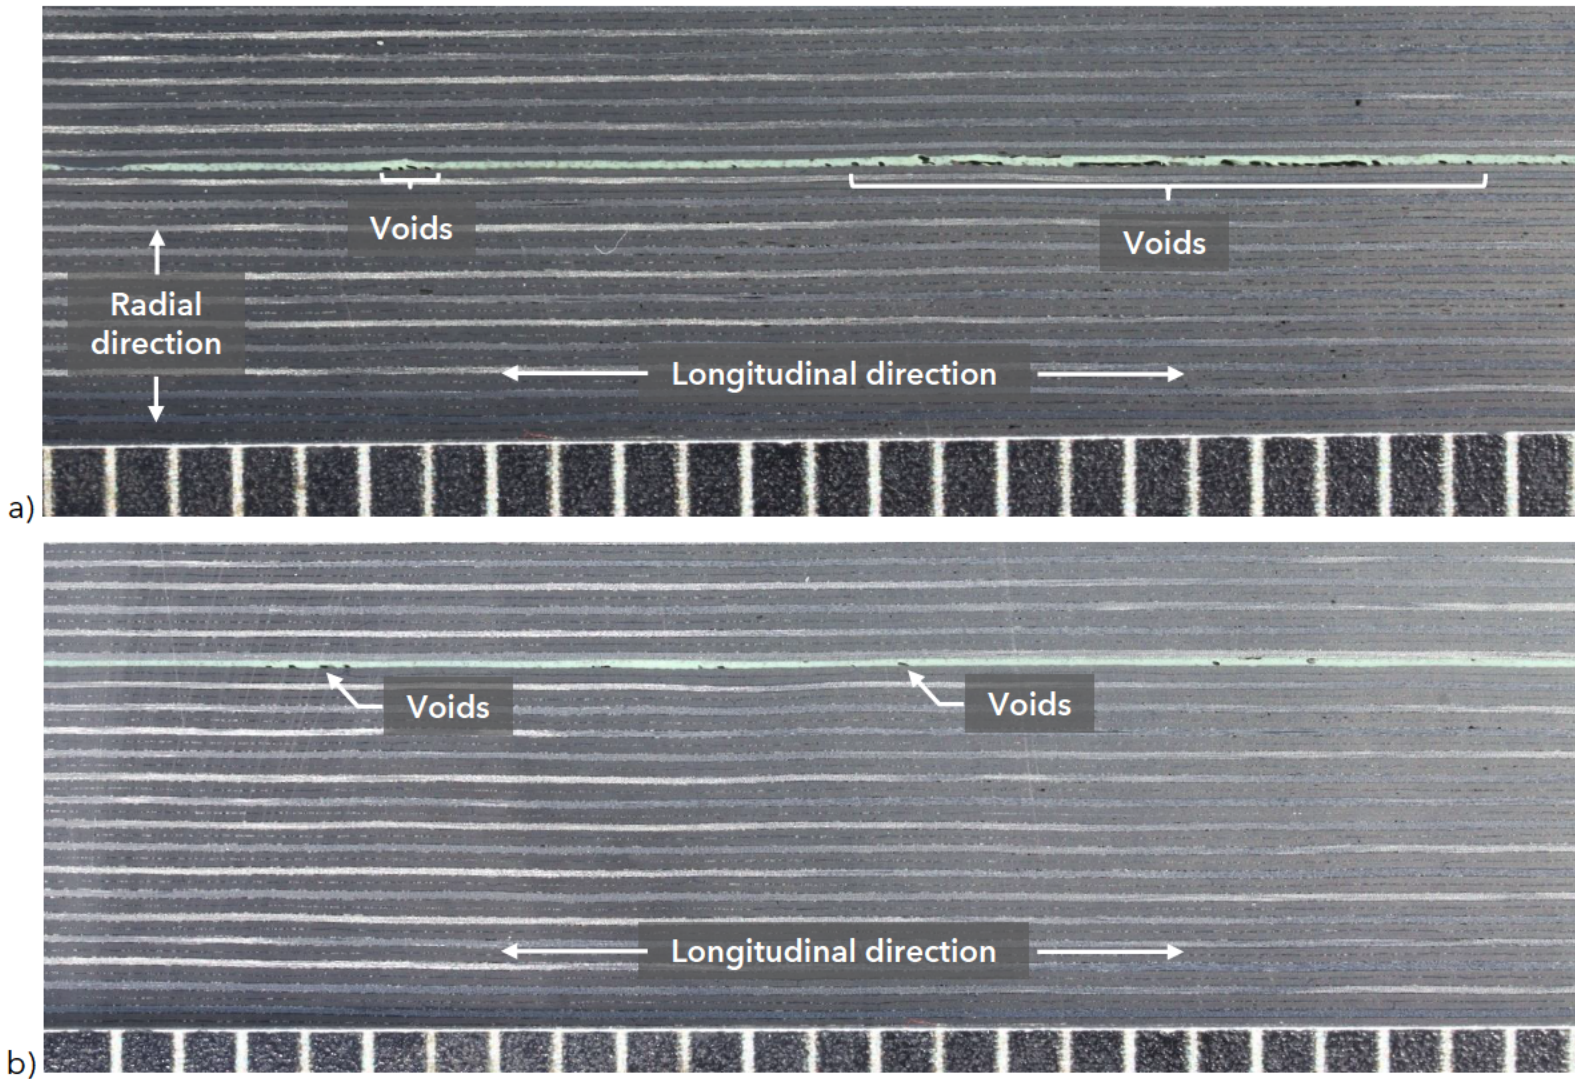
Image of the larger piece cut from end 'B'; a) viewed in the longitudinal direction and b) outer surface viewed radially inward.
